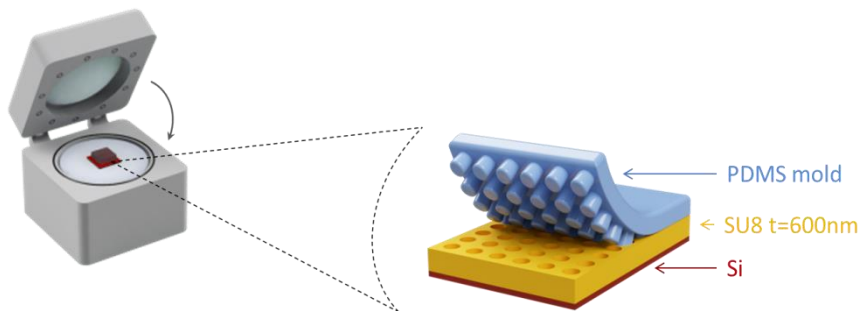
Schematic of the imprinting machine and soft nanoimprinting lithography which lead to holes array. The inset show the system loaded on the imprinting machine.
